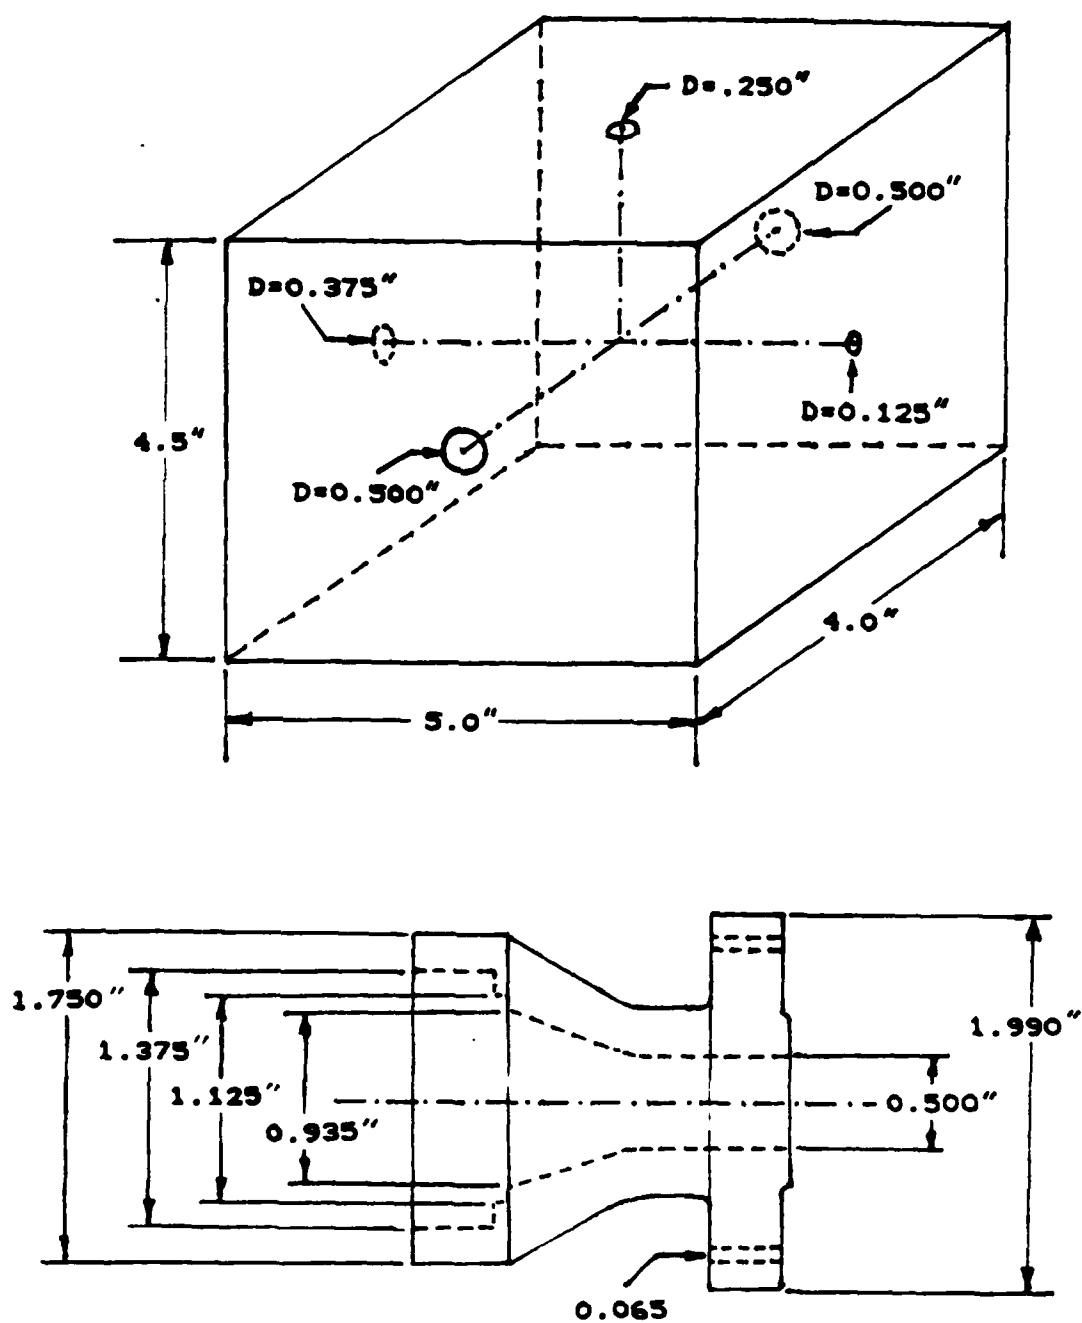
Aluminum Block and Loudspeaker Mounting Adapter Details
